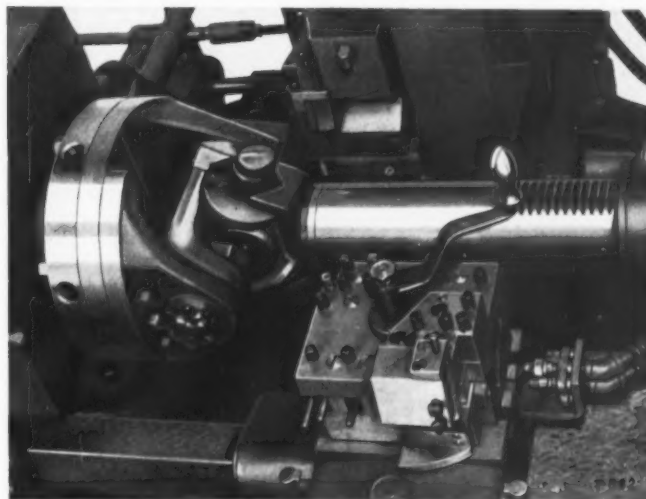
Close-up showing chuck, tooling, and centralizing device.
